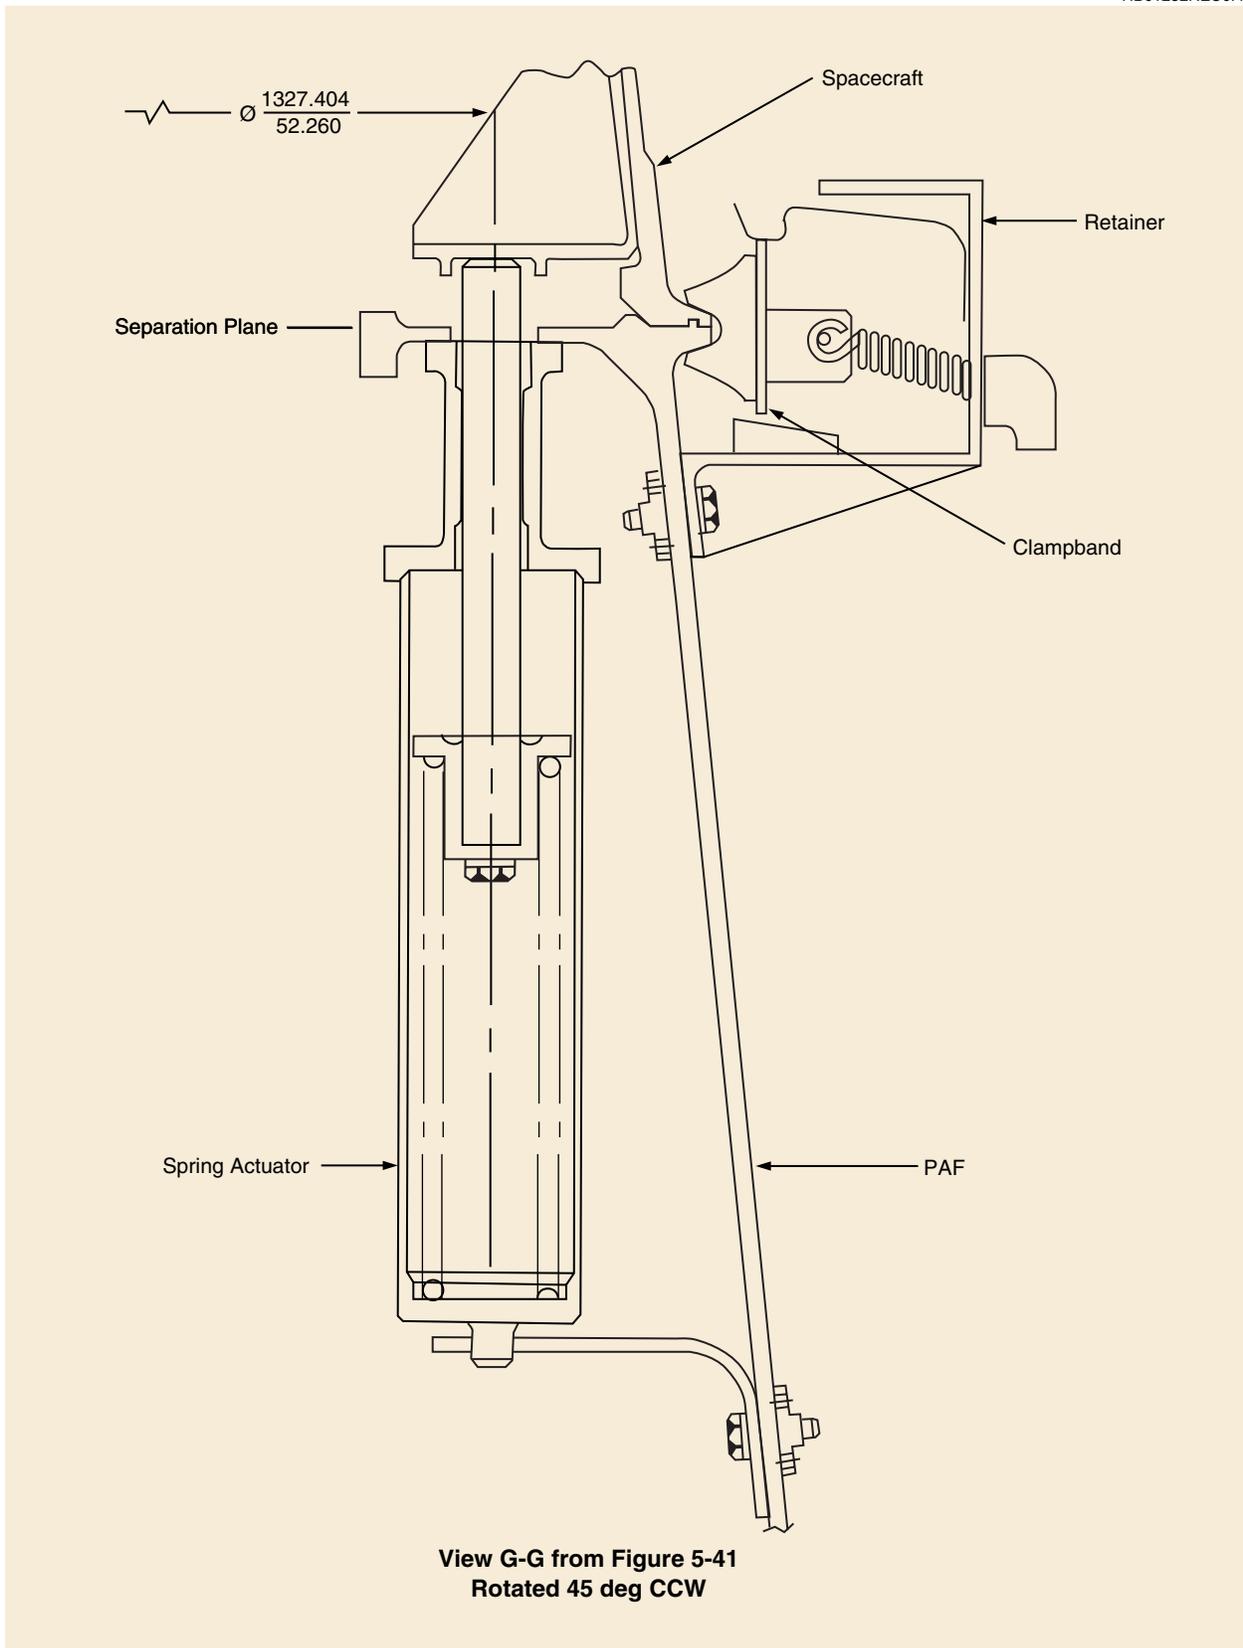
5624 PAF Clamp Assembly and Spring Actuator
